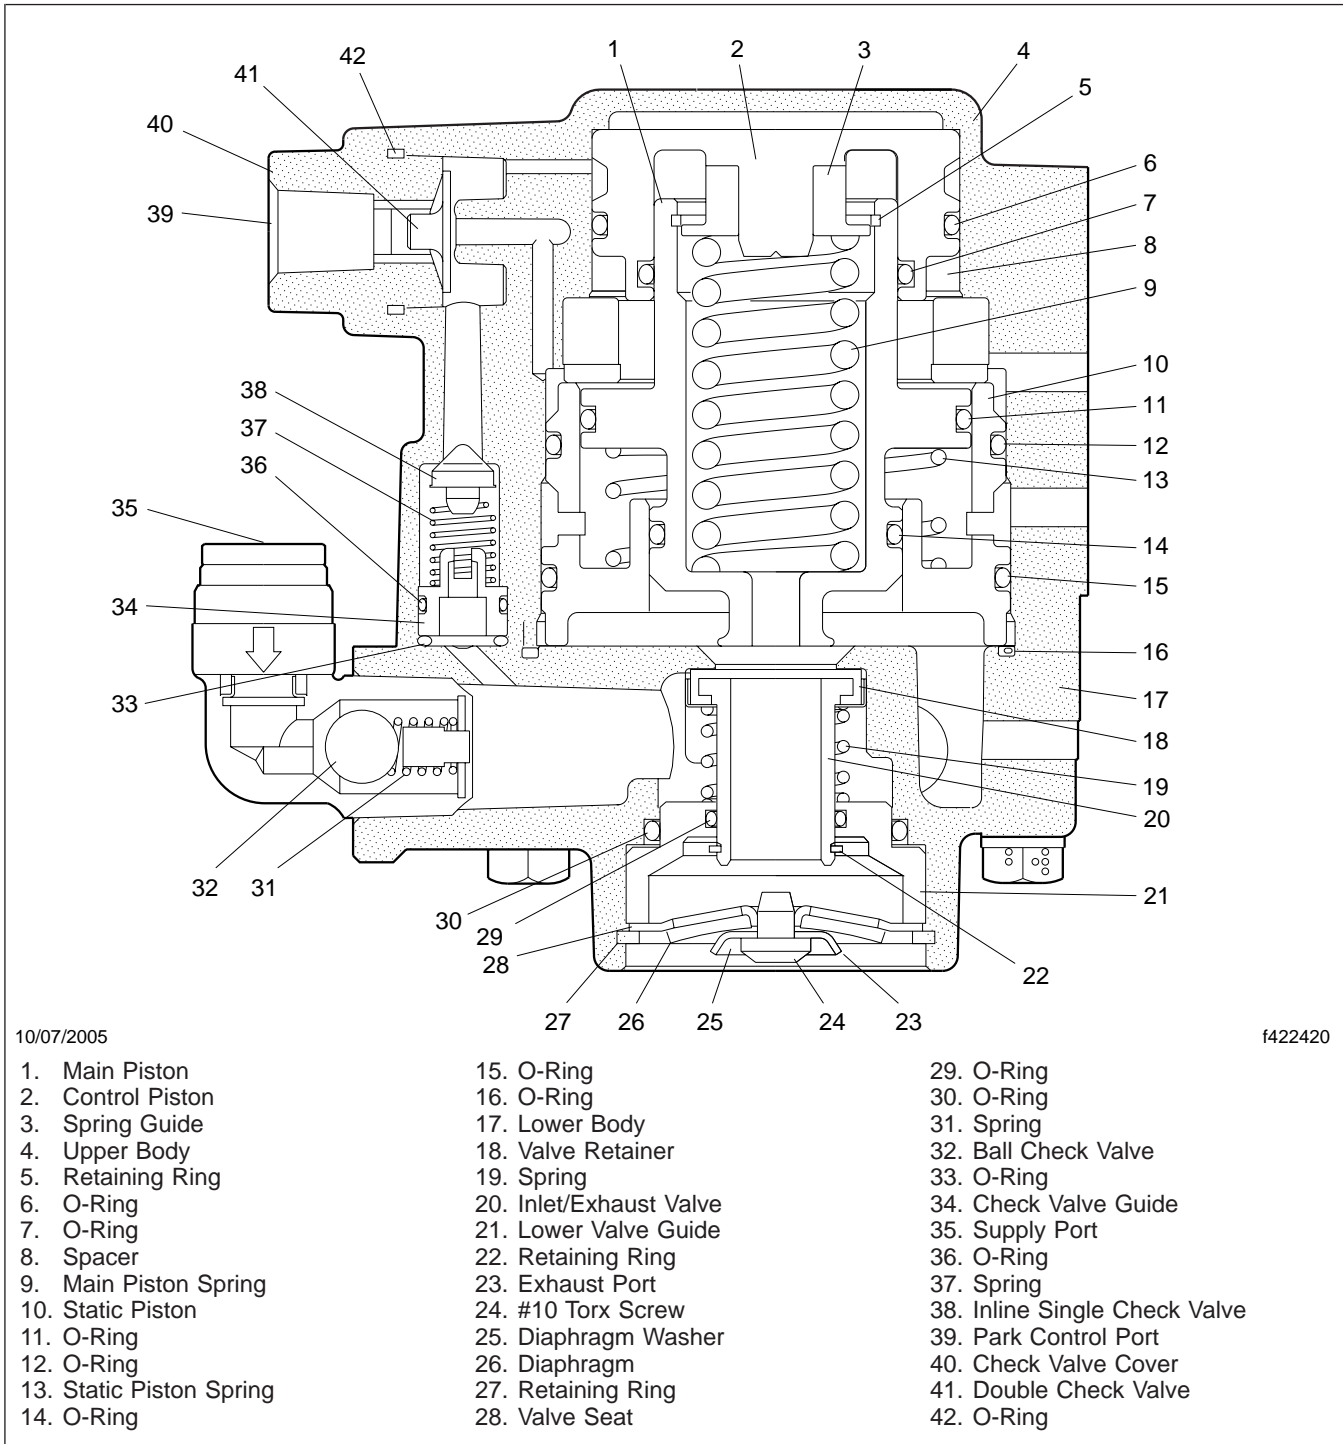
, SR-7 Spring Brake Modulating Valve (sectional view)
